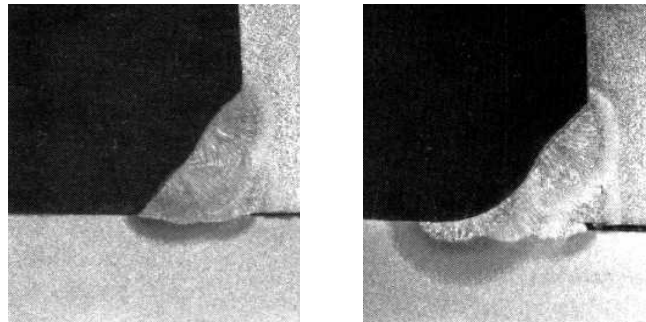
Fillet weld before and after TIG dressing (x2 magnification).
